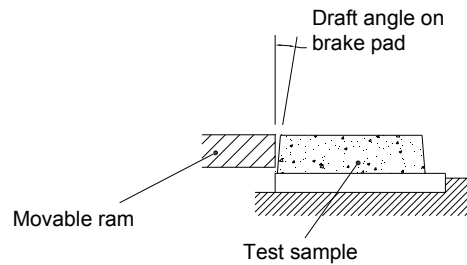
DRAFT ANGLE (EXAGGERATED) FOR MOVABLE RAM
